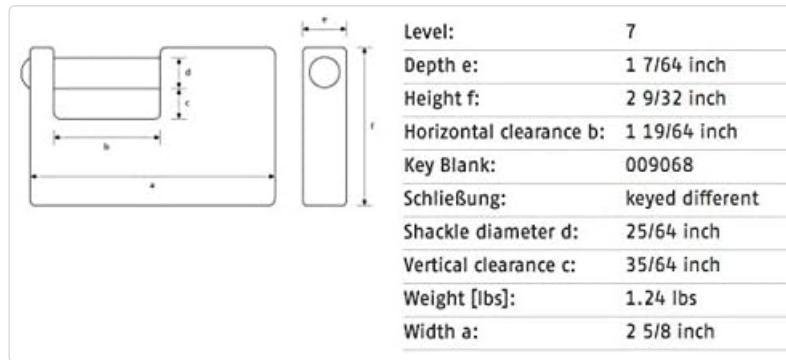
Dimensional drawing illustrating key measurements of the ABUS 92/65 padlock.
